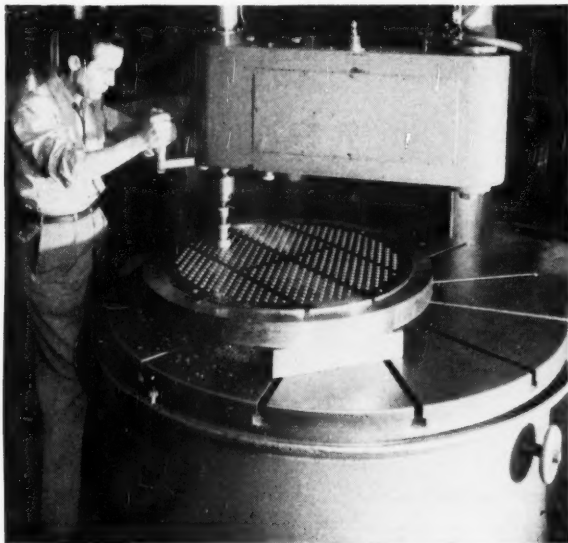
View of a special drilling machine used for drilling holes in tube covers and flanges.
